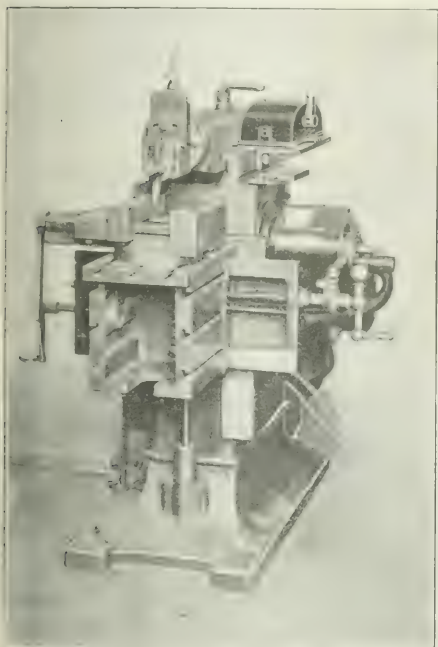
Motor-Driven Shaper Equipped with an Automatic Controller.
